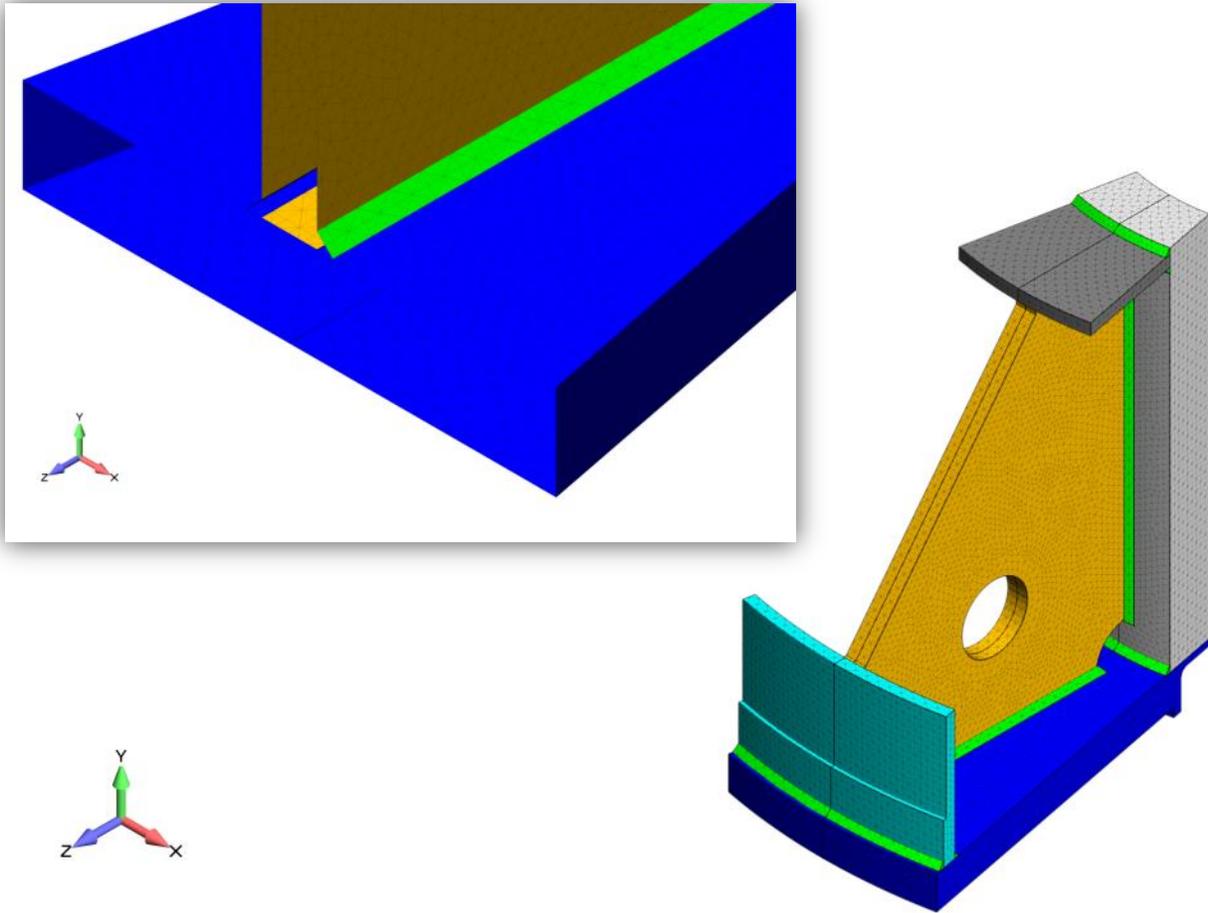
FEA model showing the idealizing of the fillet welds as chamfers
